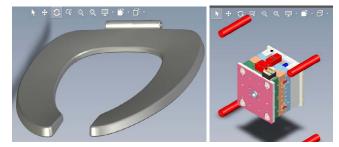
and 2: Part-CAD and Tool-CAD generated through Reverse Engineering from Prototype Part.
